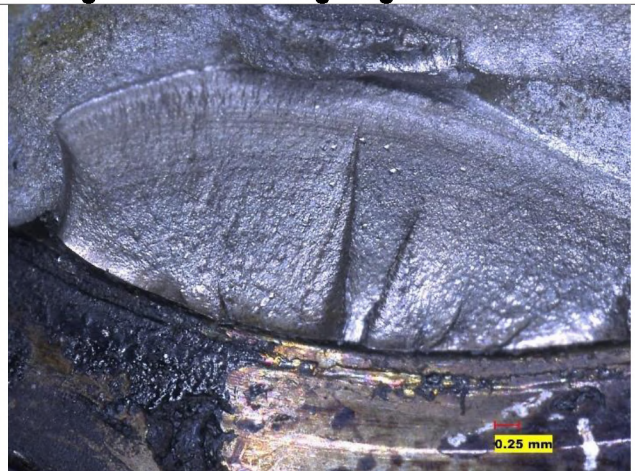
Fracture face of threaded bar, higher magnification
